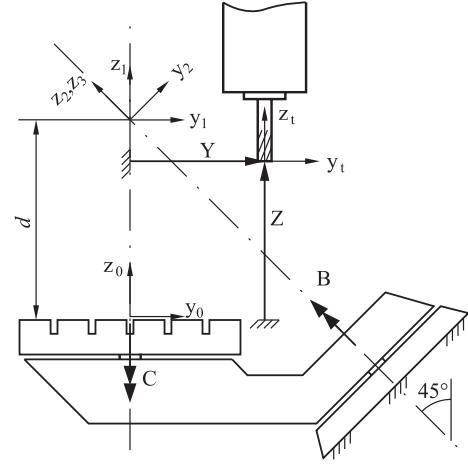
Side view sketch of a five-axis machine with non-orthogonal rotary axes. Shown with the B axis in $B = 0^\circ$ position.
